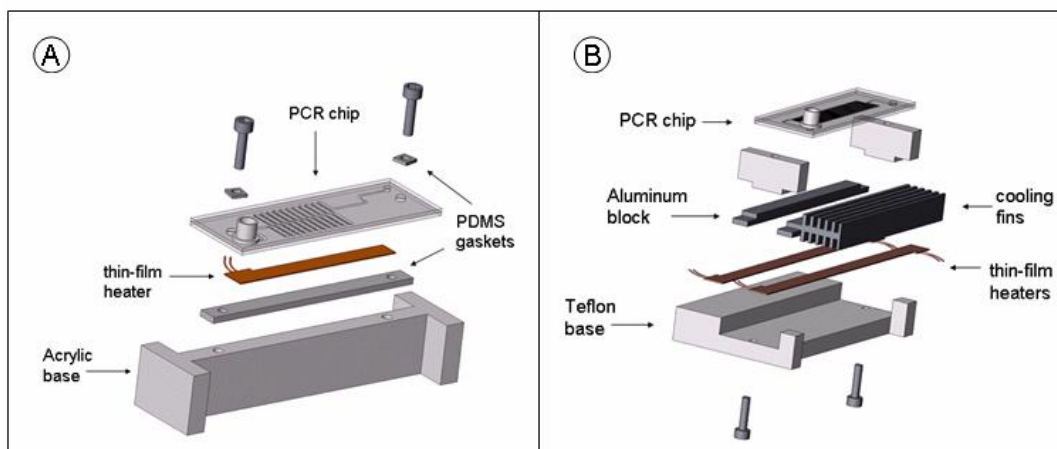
Heating platforms for the A) centerline heating assembly, and the B) edge heating assembly
